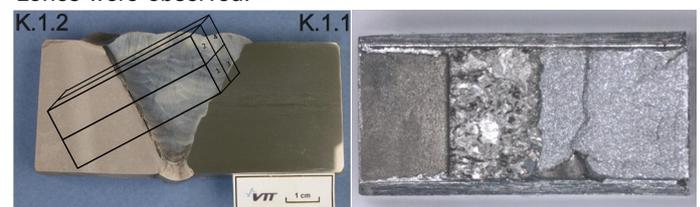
DMW mock-up, SE(B) specimens and resulting fracture surface.
